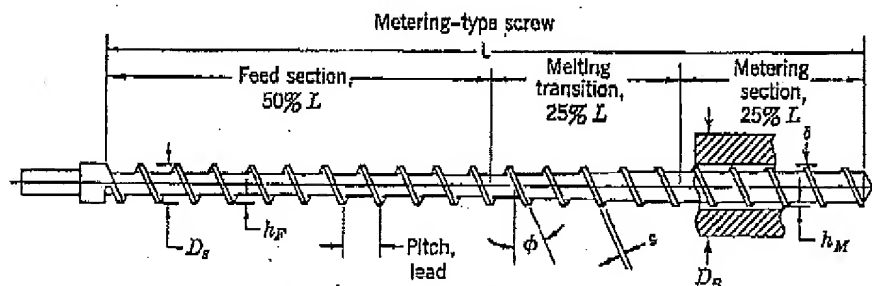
Injection screw. D_B , diameter barrel; D_s , diameter screw (nominal); ϕ , helix angle (one turn per screw diameter, 17.8°); s , land width; h_F , flight depth (feed); h_M , flight depth (metering); L , overall length; δ , flight clearance (radial); L/D , ratio of length to dia; and h_F/h_M , compression ratio.
